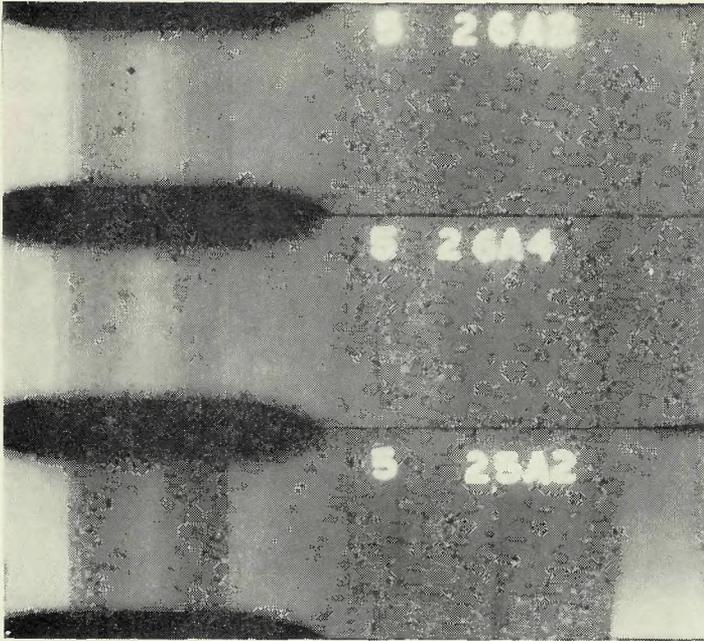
Radiographic image of a 5556 weld in a 1/2-in. thick cast 218-F panel welded with the gas metal-arc method
